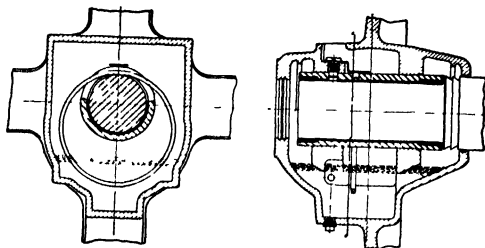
Cross-section of sleeve bearing and bearing housing.
